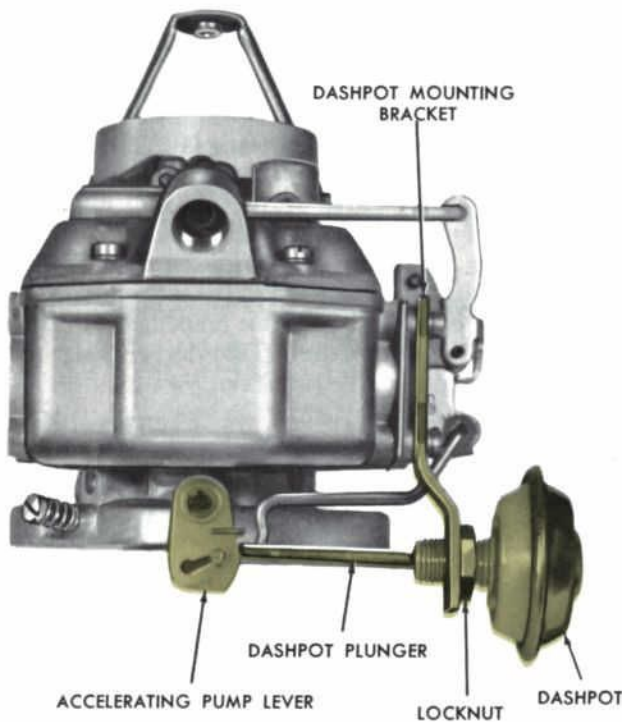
Ford 1-V Carburetor Dashpot Adjustment—
